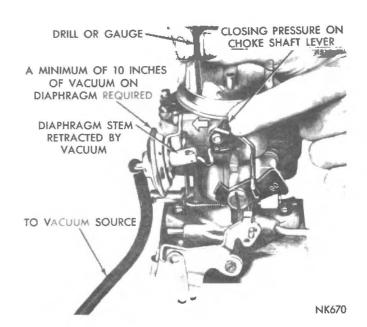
Measuring the Choke Vacuum Kick Setting.
